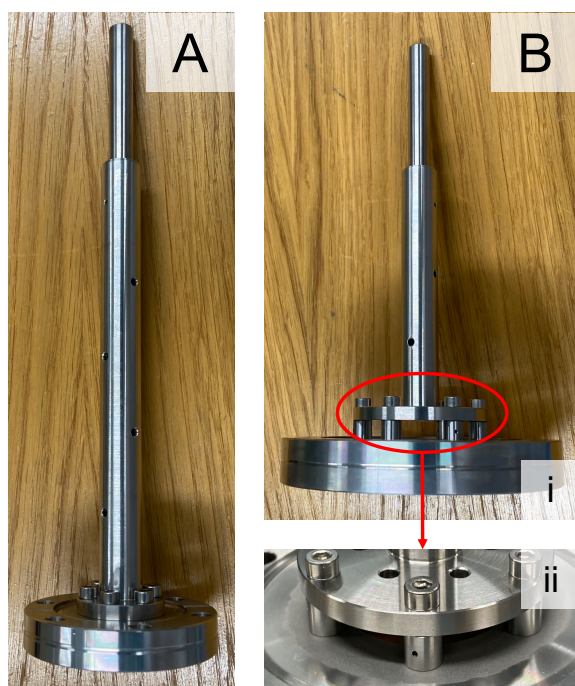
A - Powered electrode assembly. B - Grounded electrode assembly (i) with enlarged image showing the spacers used to maintain gas flow (ii).
